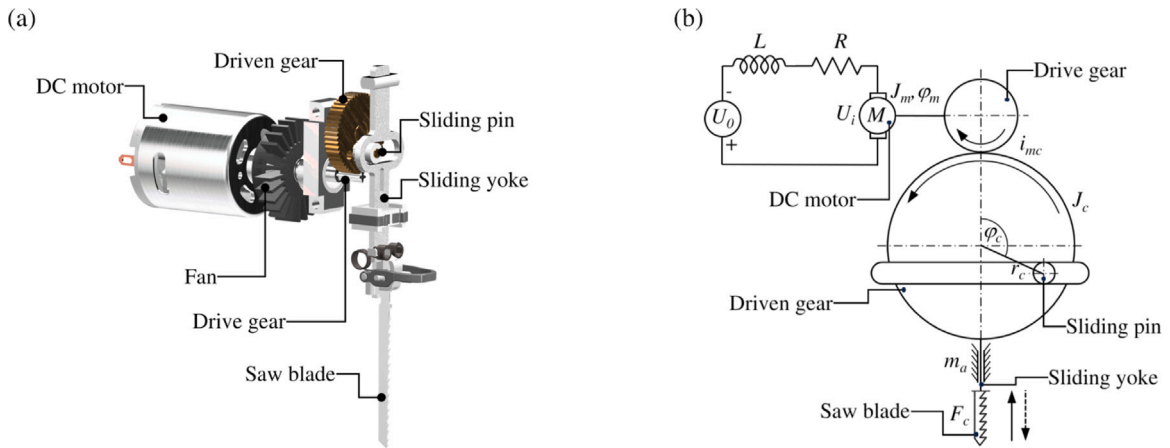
Electromechanical model of the jigsaw driving mechanism. (a) Main components of driving mechanism with DC motor and Scotch yoke mechanism; (b) Main design parameters — electrical and mechanical — of electromechanical model of driving mechanism.
